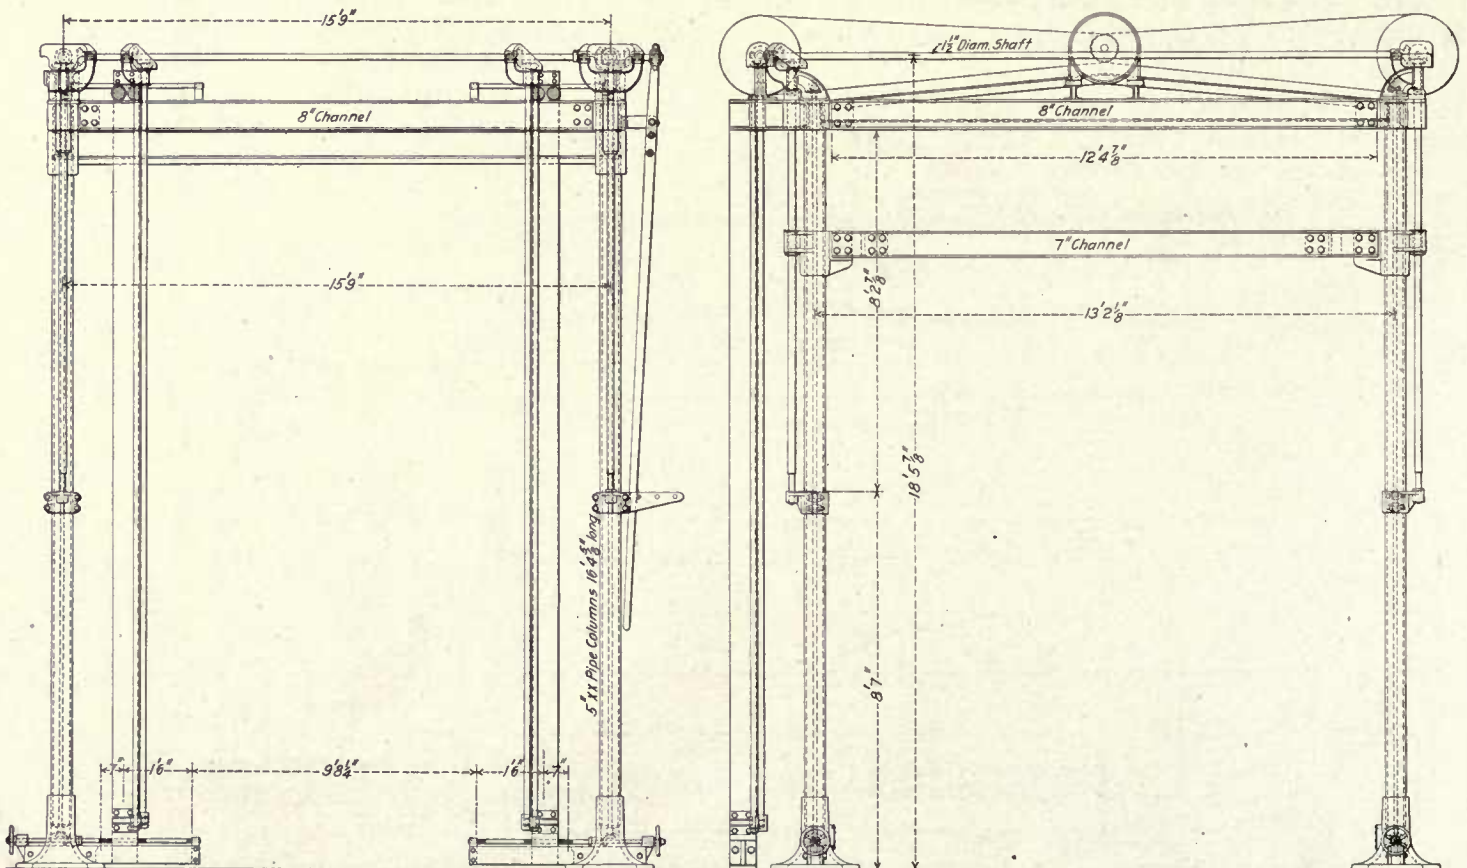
Side and End Elevation of Multiple Staybolt Drill.
